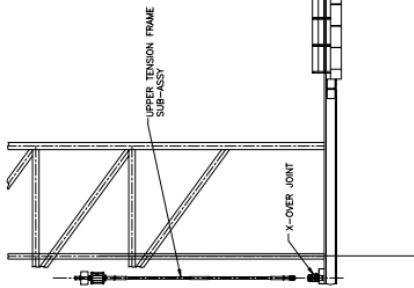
UW0899-00 / AO32-2-102-010-LN-10-DK-011 (Sheet 2/8)
